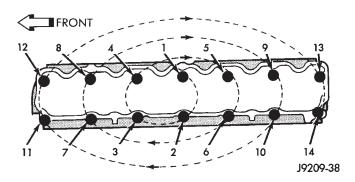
Cylinder Head Cover Gasket Locator Pins at #8 & #9
